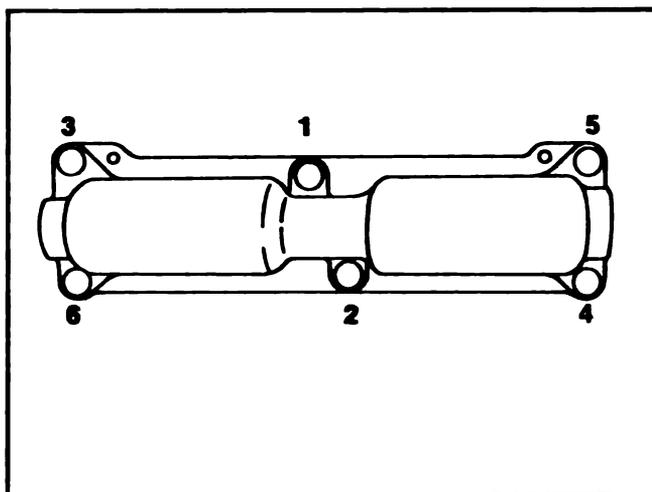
(N114236). Tightening Sequence For The Cam Follower Housing.
